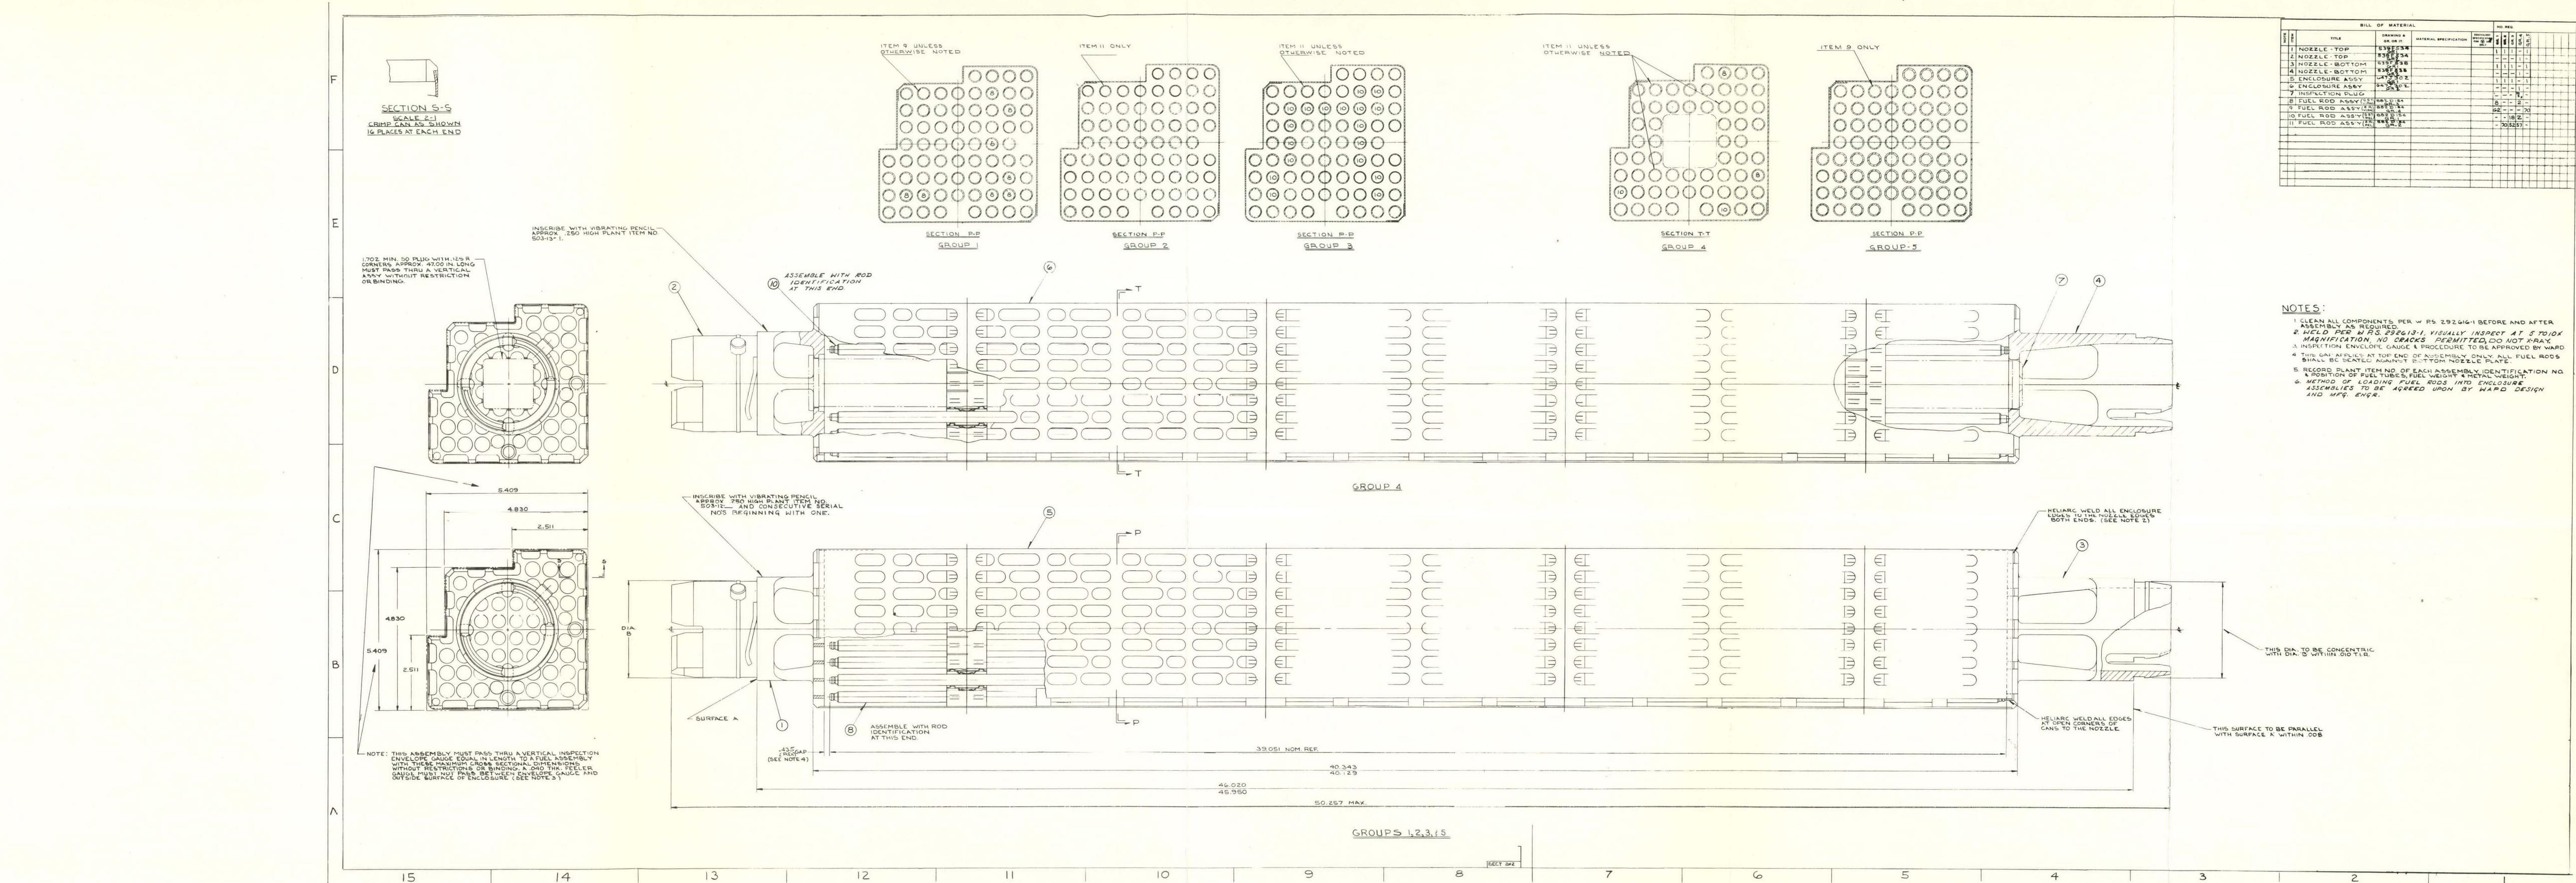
Saxton Reactor Plant - Plutonium Fuel Assembly
